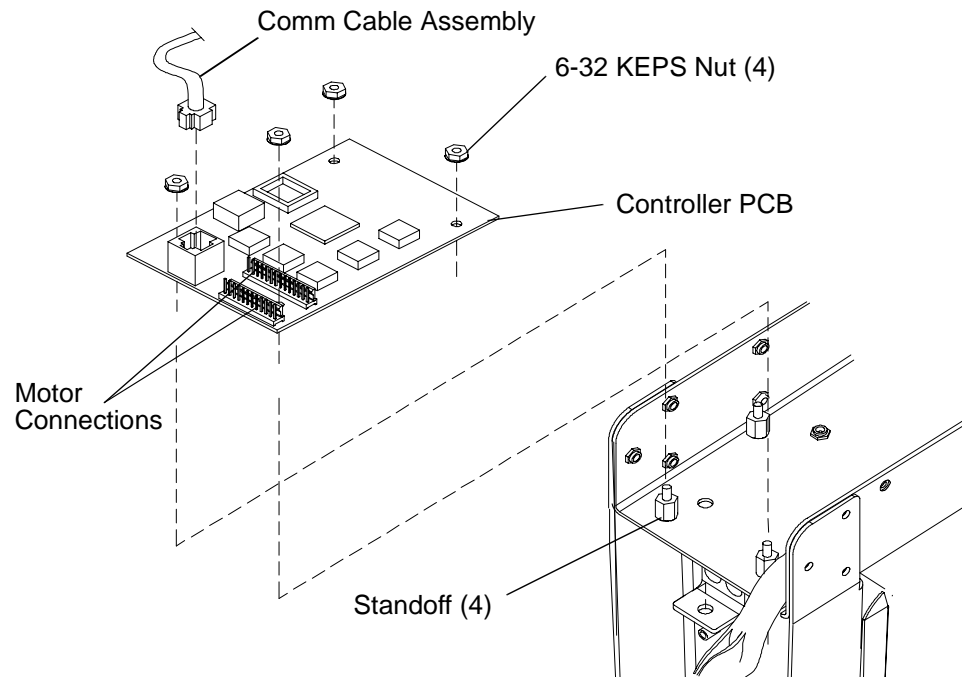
VL6B/VL6C Luminaire Controller PCB Assembly Replacement
